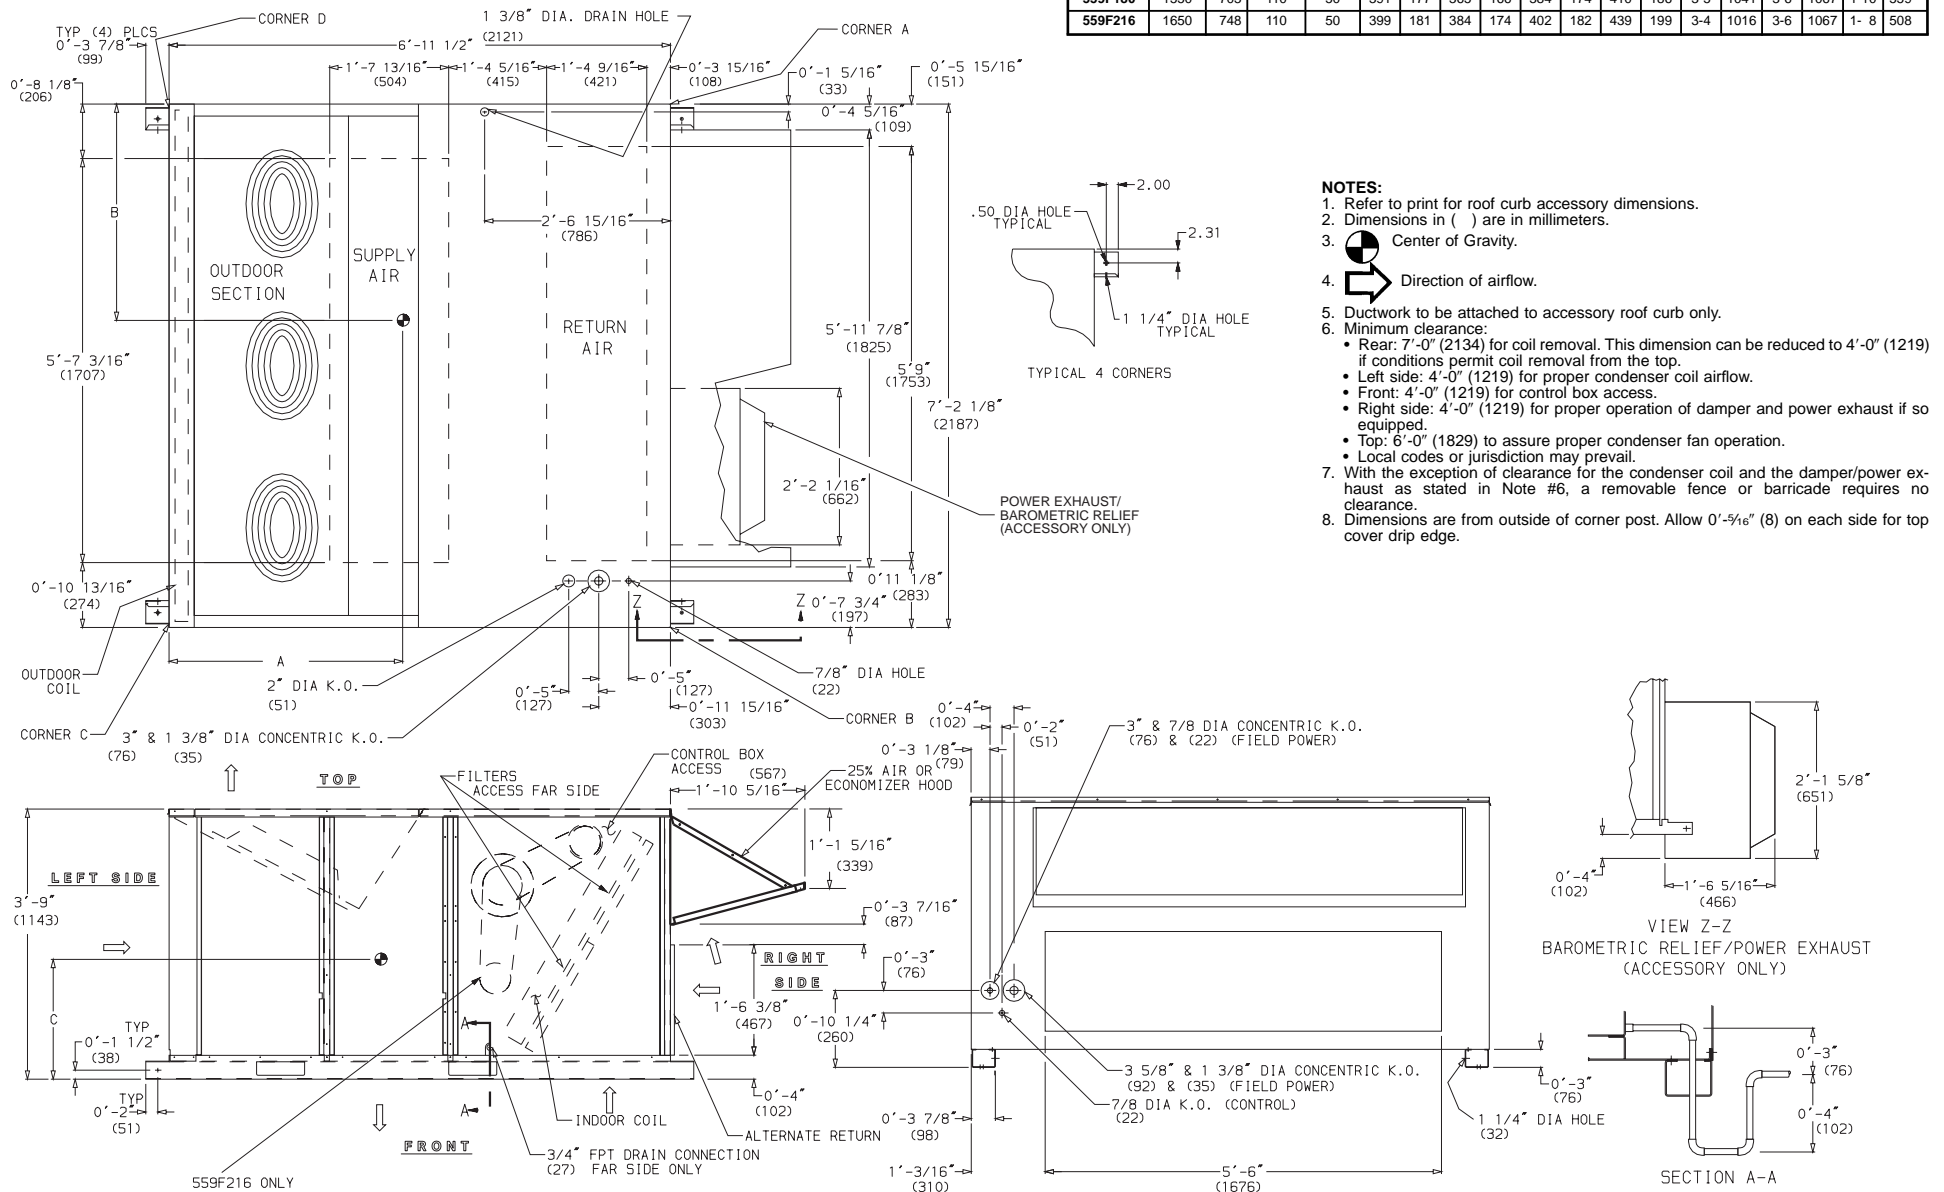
Base Unit Dimensions, 559F180 and 216
